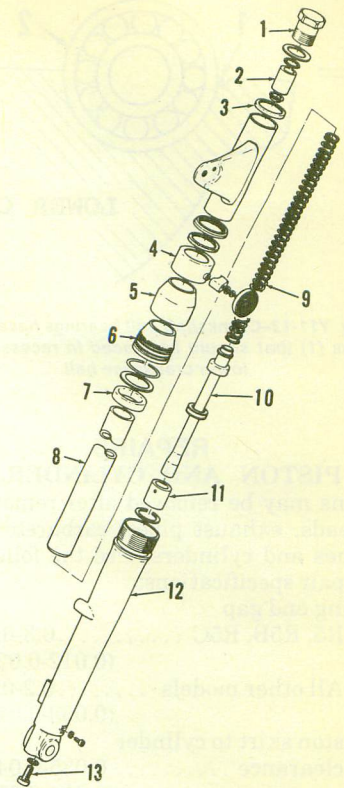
Exploded view of model DS7, R5, R5B and R5C front suspension unit.
